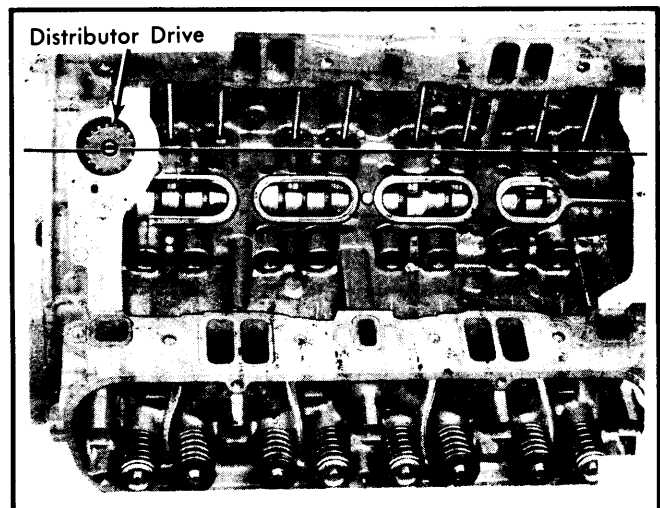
Alignment of Distributor Gear with Engine for Distributor Timing
